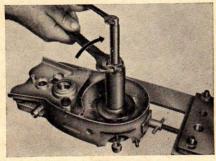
Replacing crankshaft in the left hand crankcase half-member
